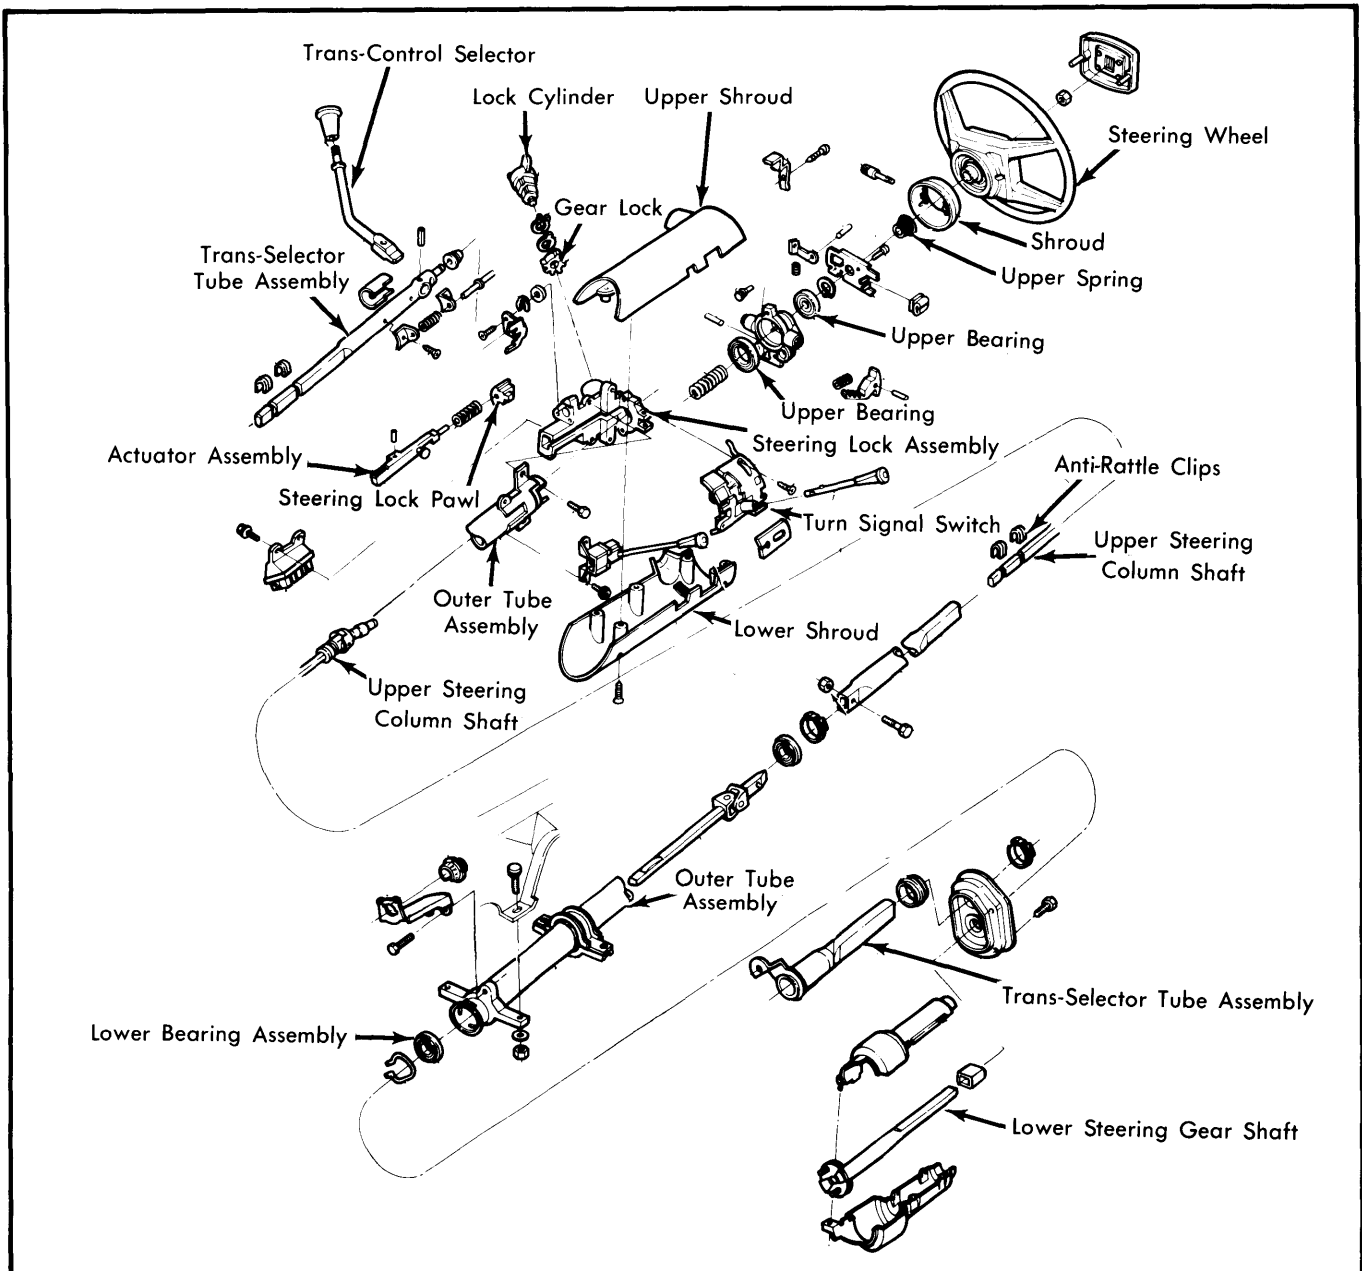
Exploded View of Ford Motor Co. Tilt Column Assembly
